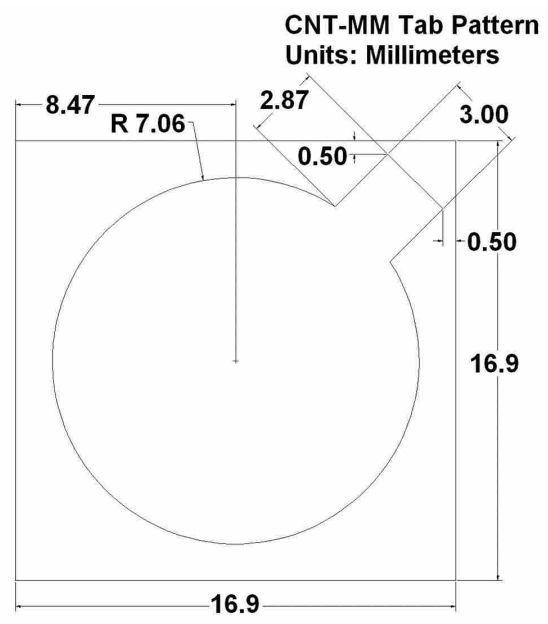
CNT-MM tab pattern; CNT-MM samples of this macroscopic geometry employed the small and large circle microchannel patterns.
